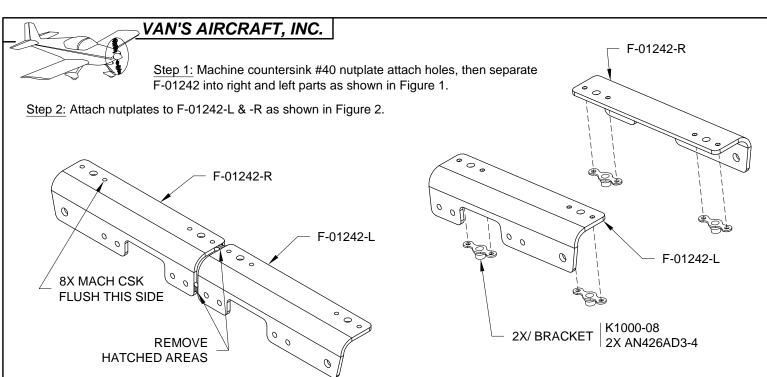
COUNTERSINKING & SEPARATING F-01242
